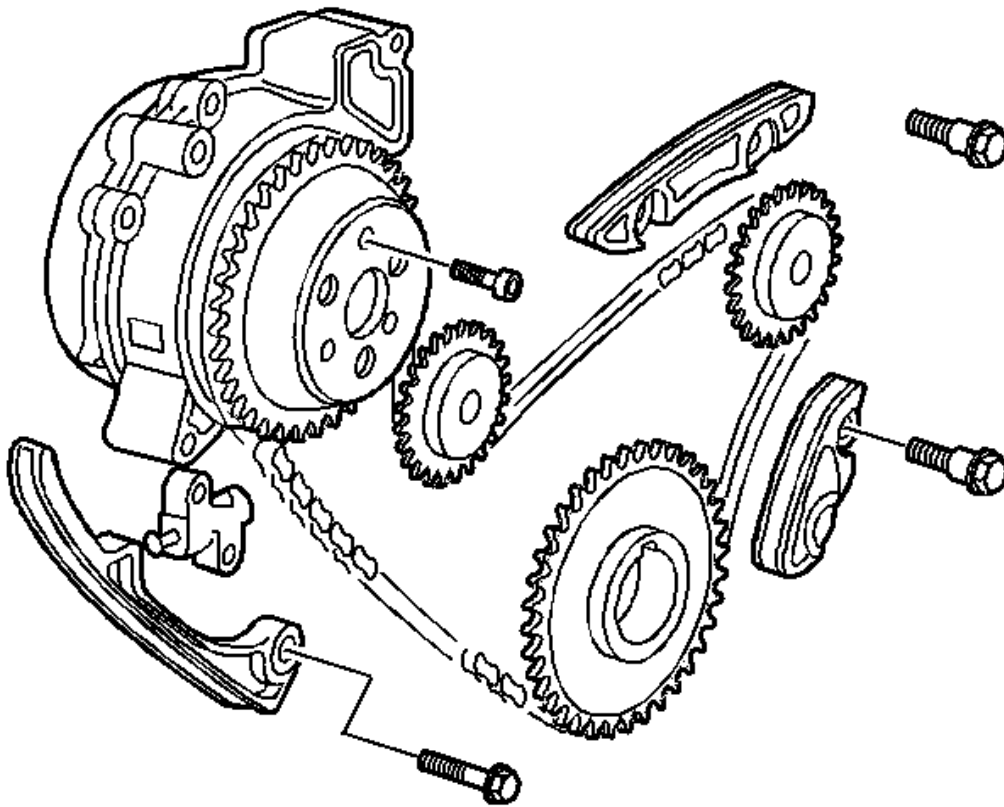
Inspecting Balance Shaft Drive Chain & Sprockets
